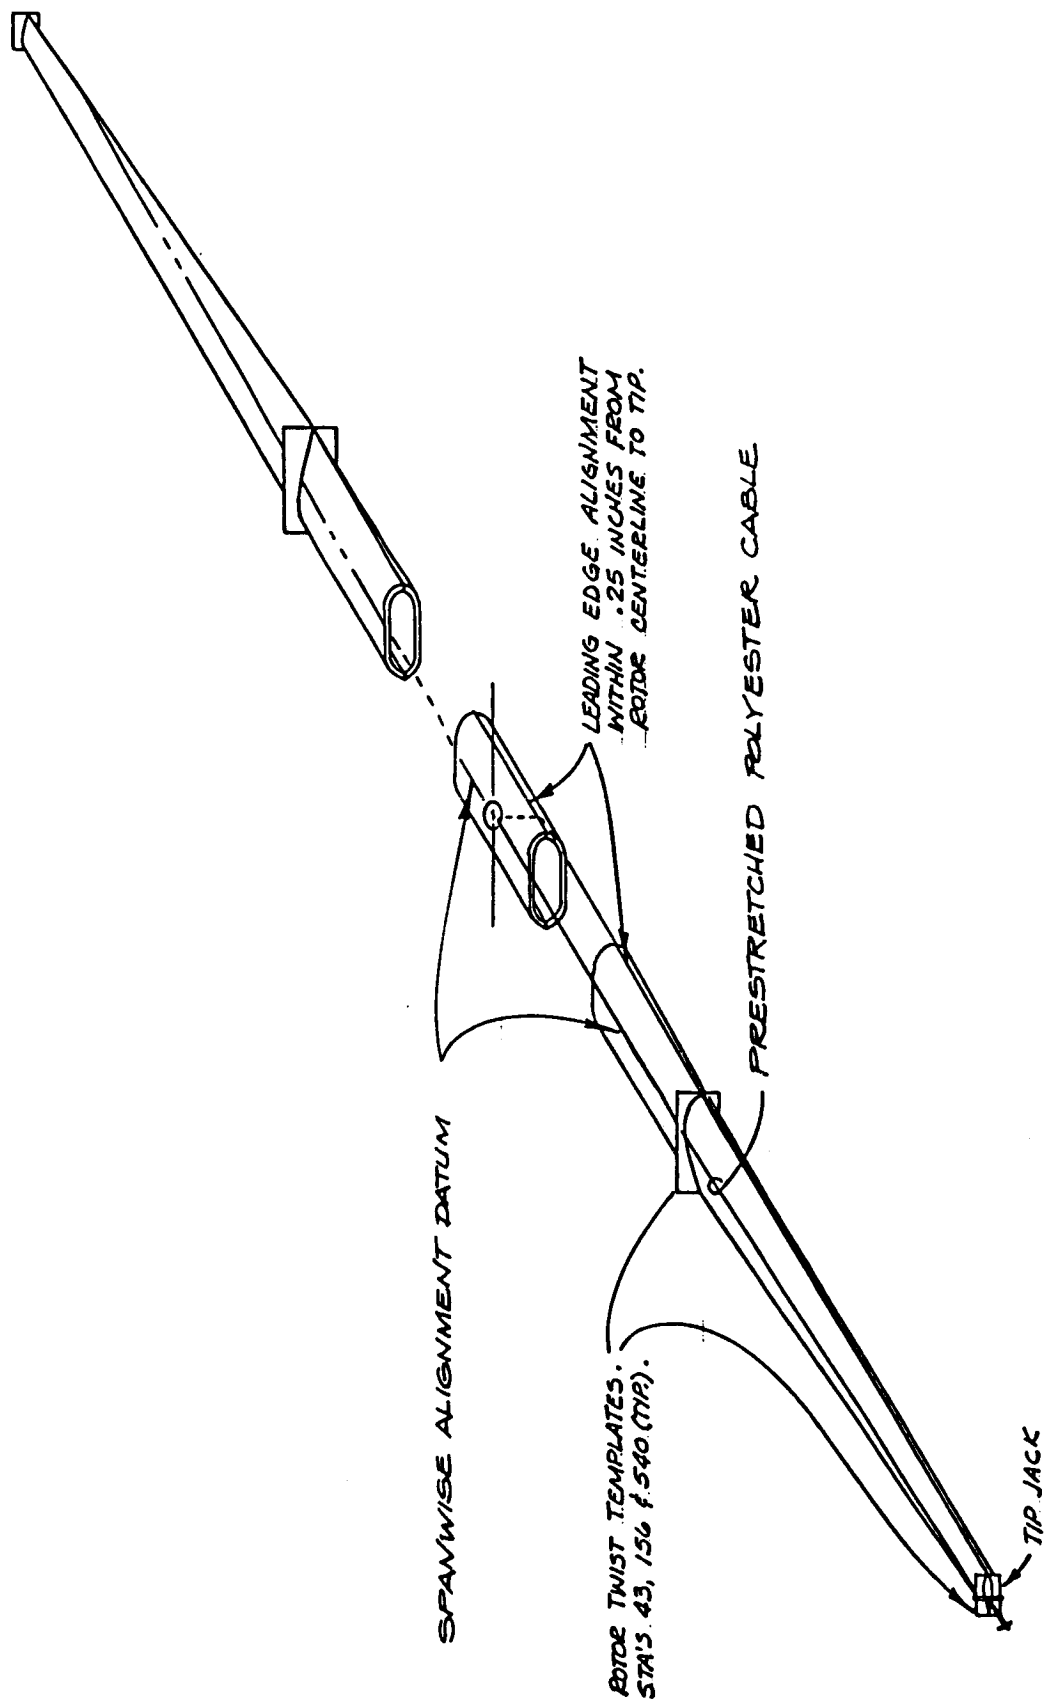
Rotor Assembly Alignment and Clamping Schematic
